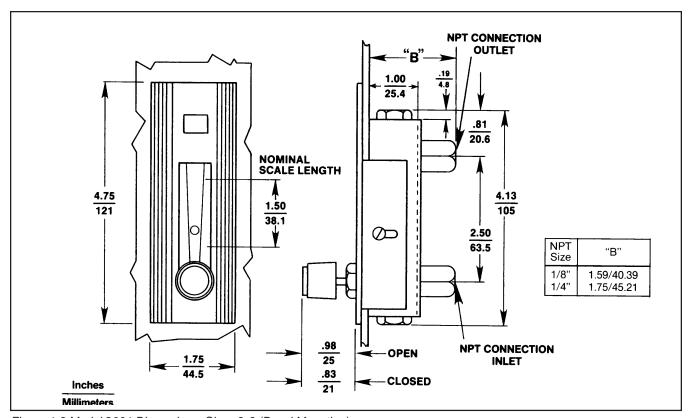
Model 2001 Dimensions, Sizes 2-6 (Bezel Mounting)
